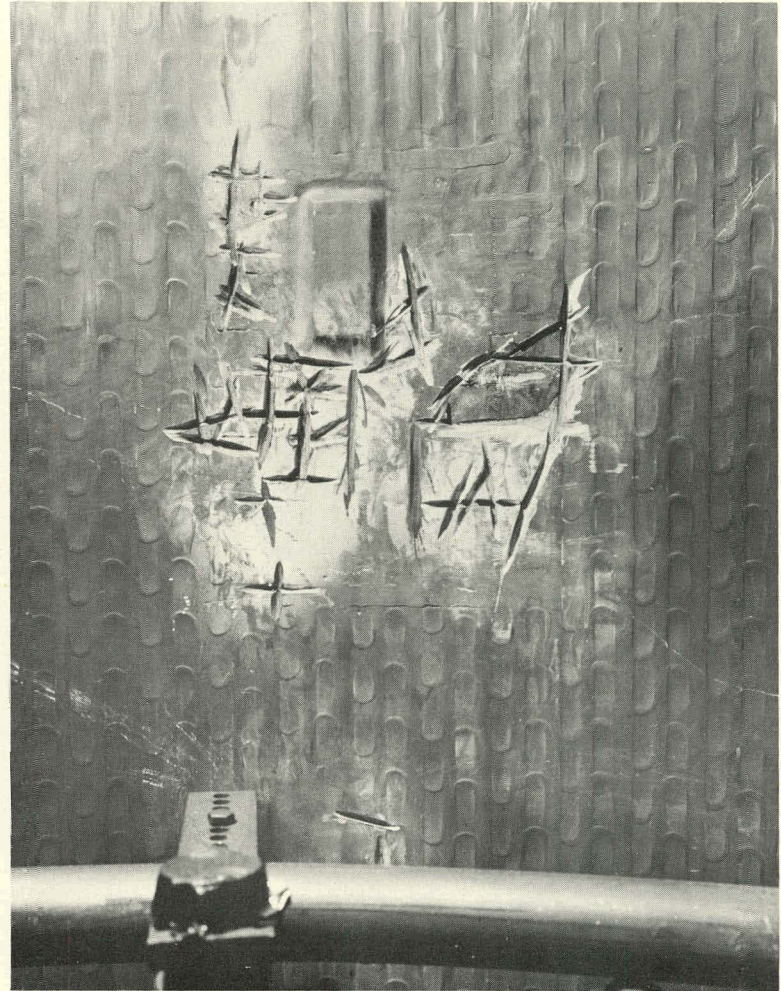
Post-grinding appearance of panel having greatest number of initial "surface defects." Also see panel No. 8 on Fig. 1-43.
